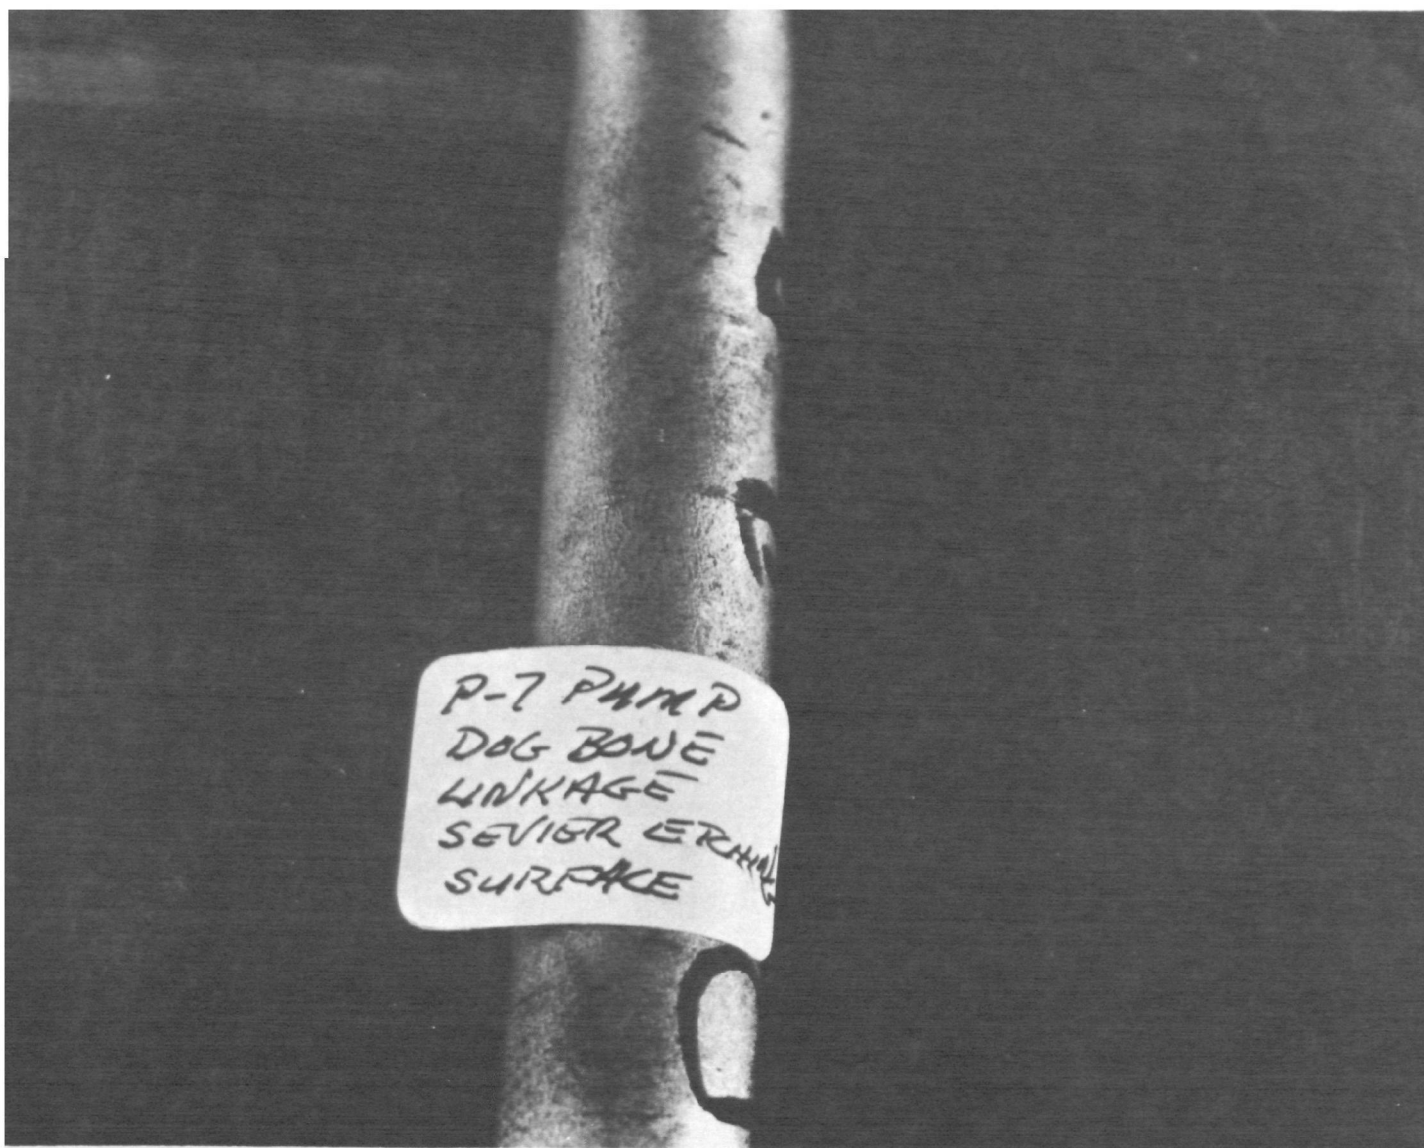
Universal Linkage Shaft from Slurry Feed Pump P-7.
